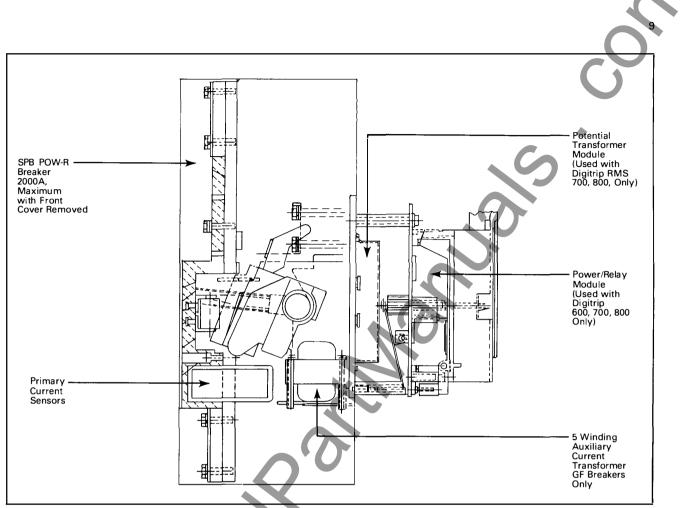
Side View of 2000 A Maximum Pow-R Breaker
